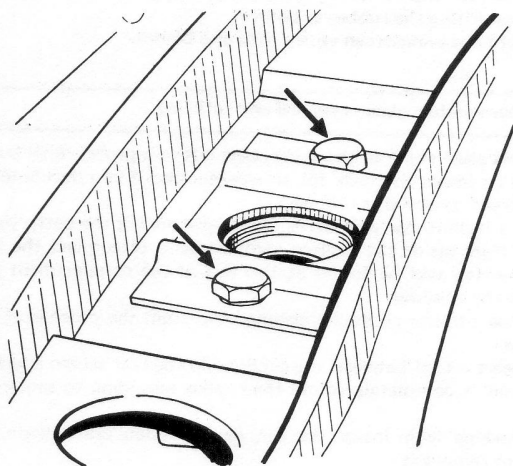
Location of the setscrews securing the bonnet catch striker plate
